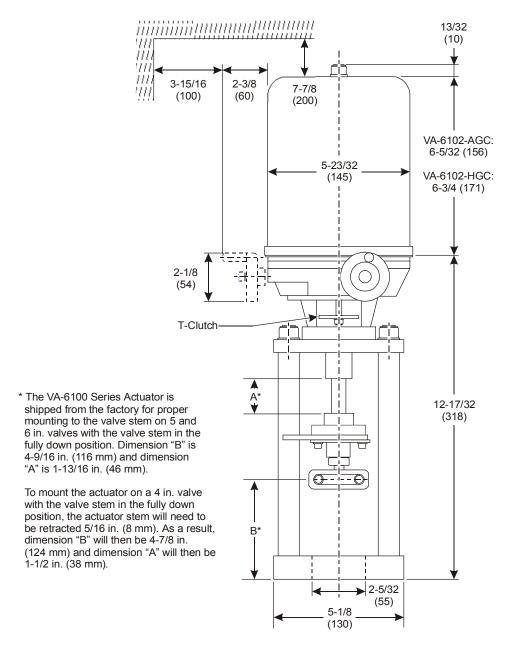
VA-6100 Series Electric Valve Actuator Dimensions, in. (mm)
